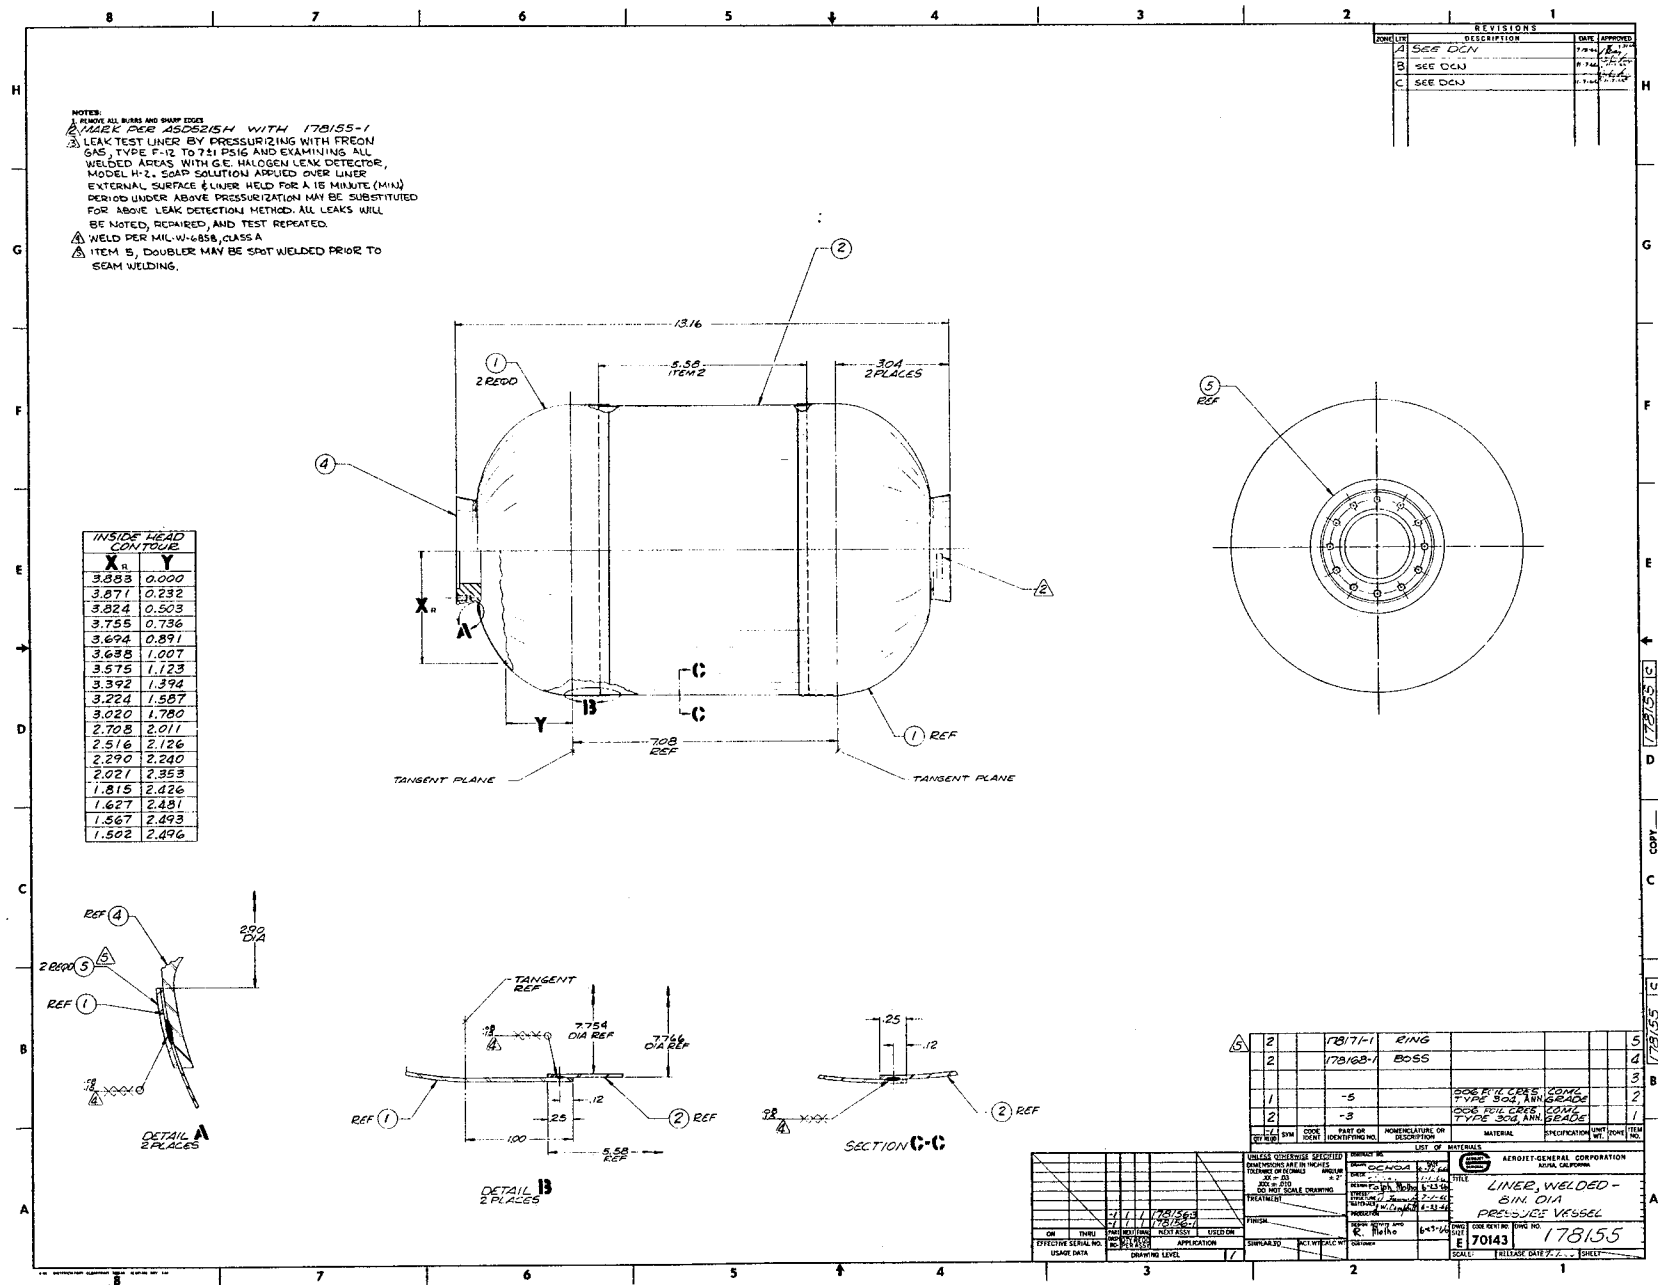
Welded Liner, 8-in.-dia Pressure Vessel
